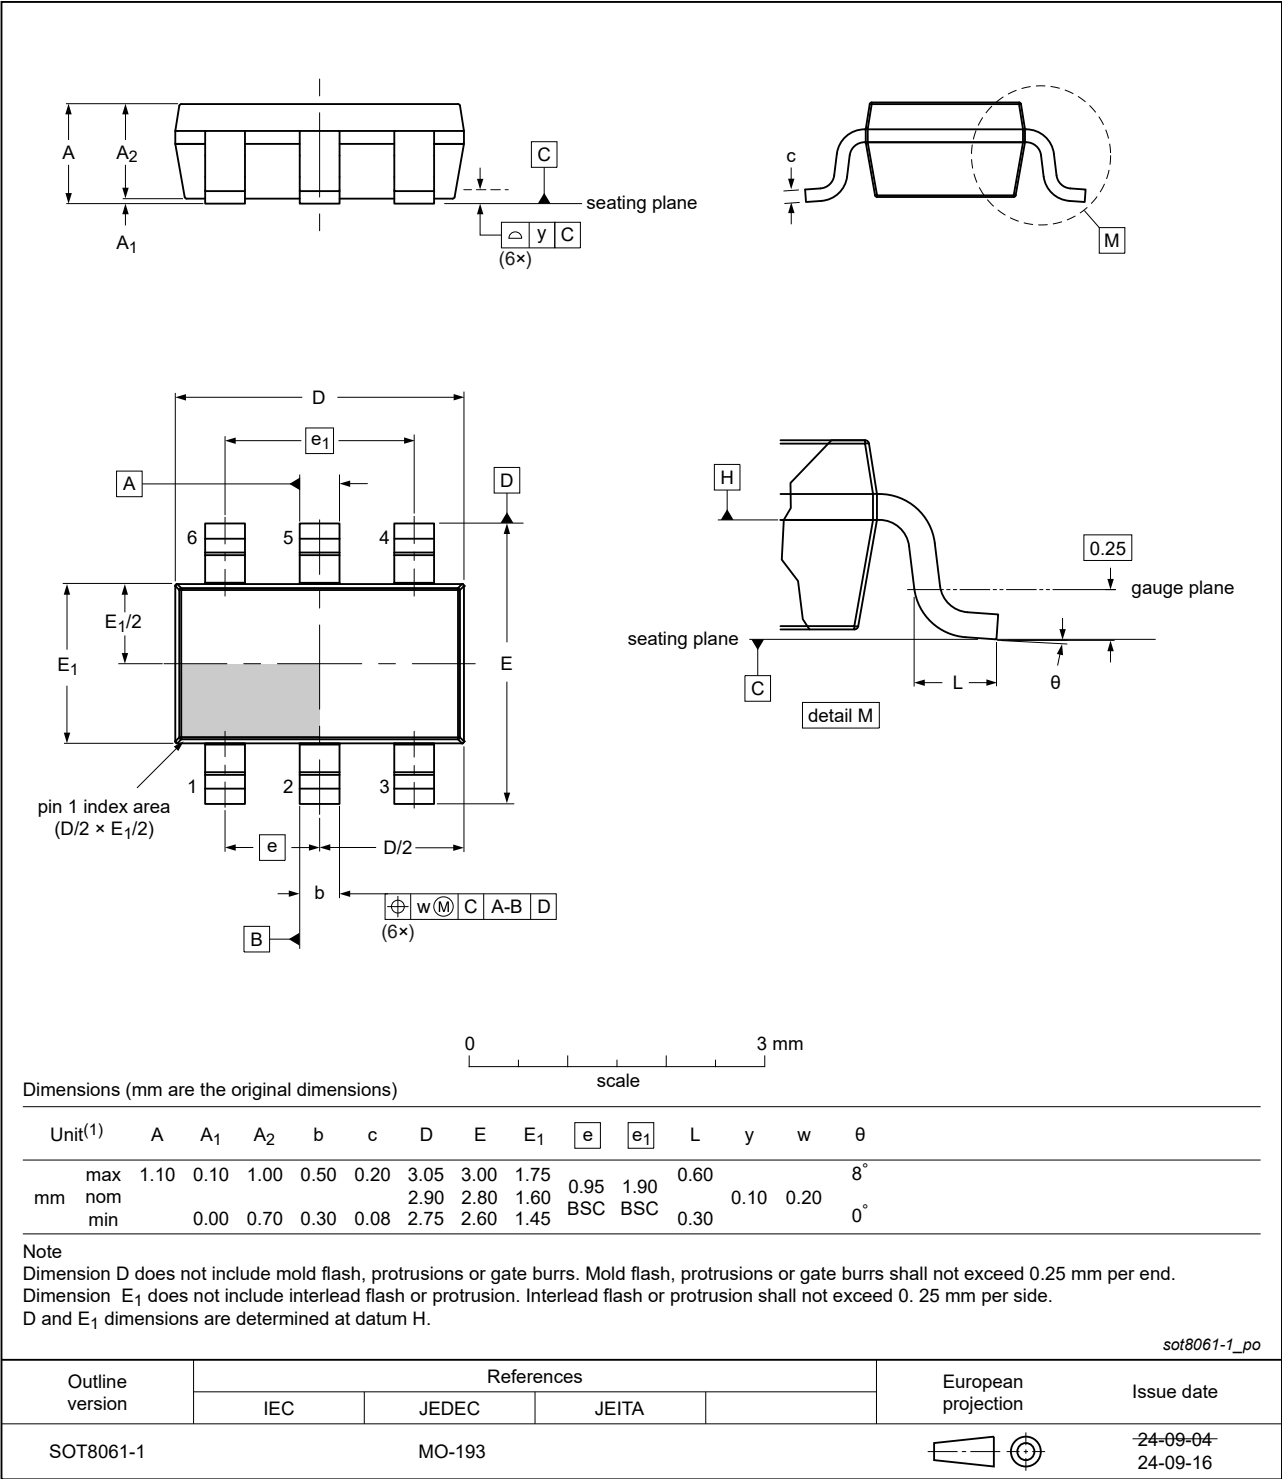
Package outline SOT8061-1 (TSOT23-6)
